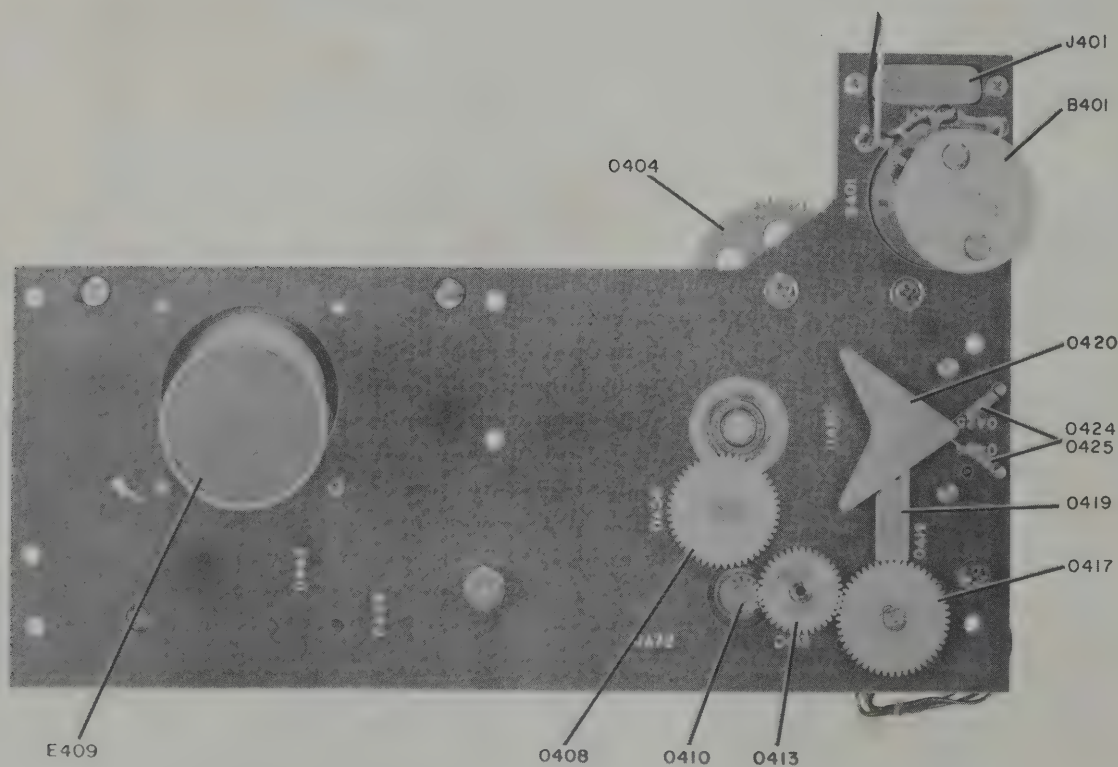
Variable Inductor Subassembly, Top View with Drums Removed
